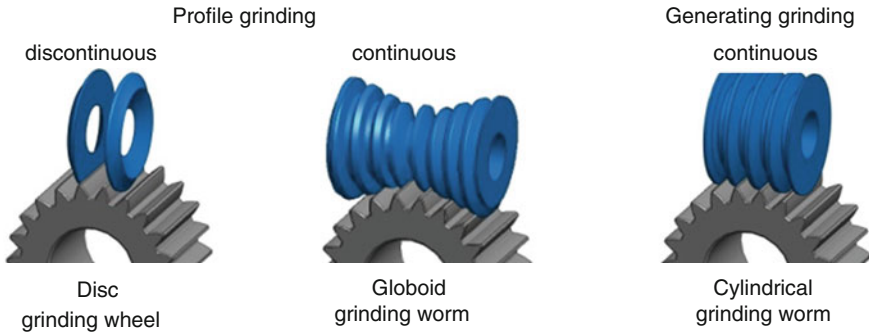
Gear grinding tools, with permission from the Gear department, WZL of RWTH Aachen University
